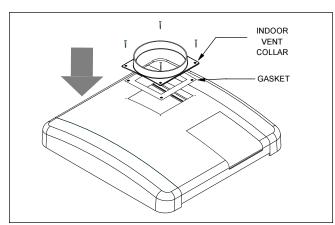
Vent Collar Assembly for Indoor and Outdoor Shelter Installation.
